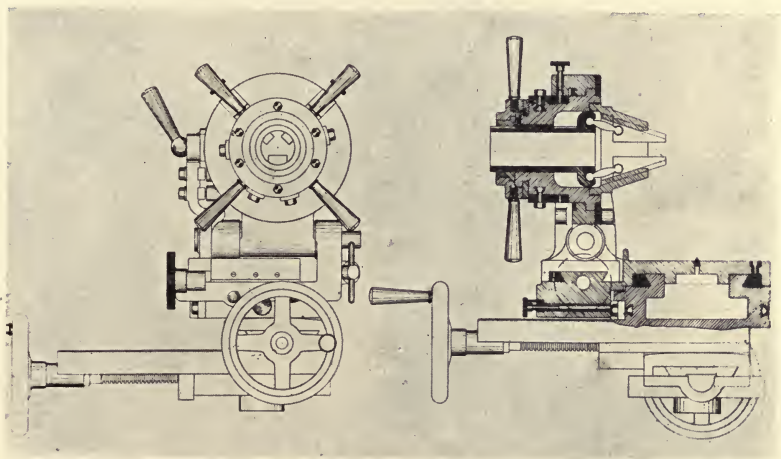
LUMSDEN TOOL GRINDER. TOOL HEADSTOCK
